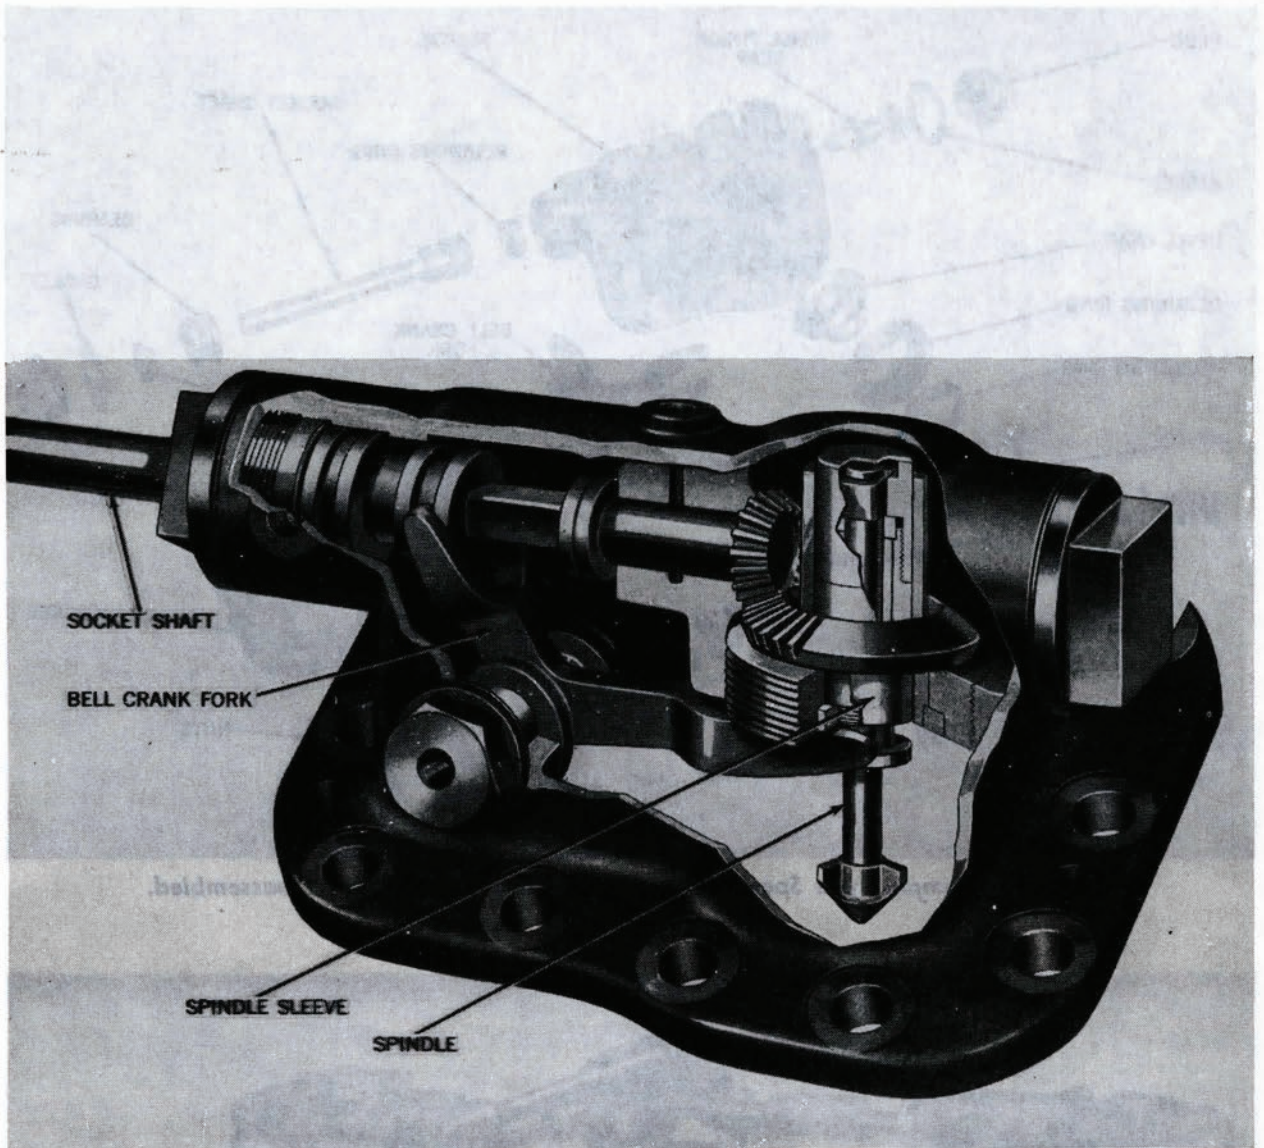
Simple Type Speed Setting Mechanism—Spindle Housing—Sectional View.
